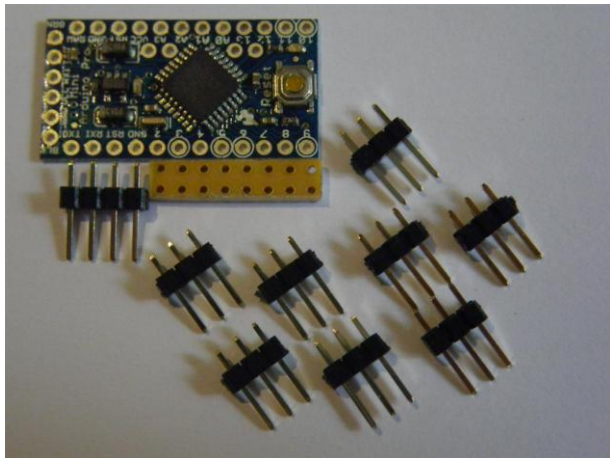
Cut a conductor plate to the right size (2x8 holes) and cut the pins as shown in the picture
